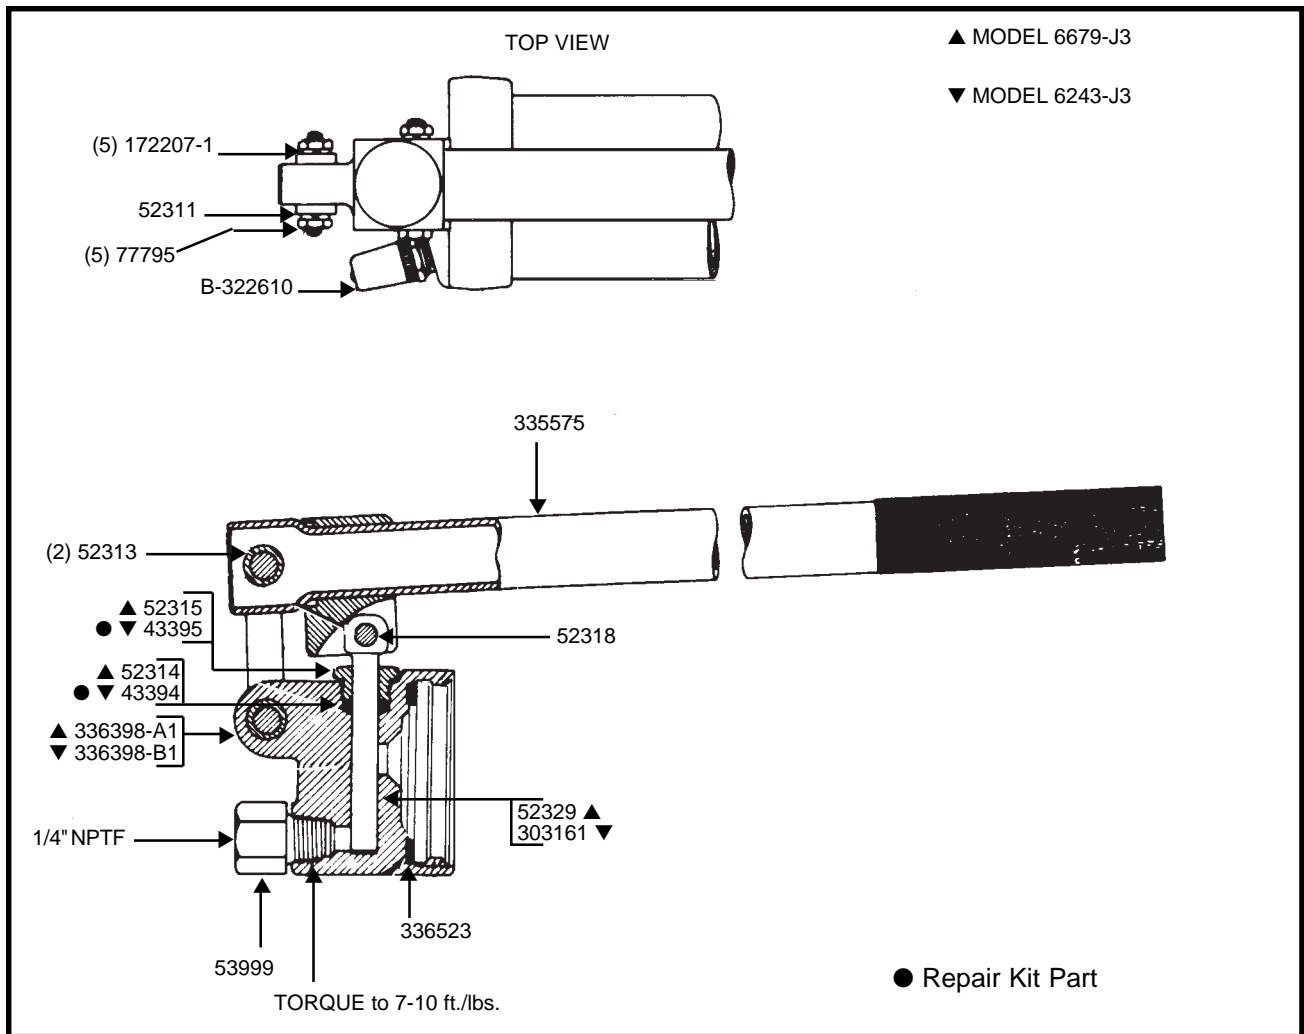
Head Assembly for Models 6243-J3 and 6679-J3 Guns
